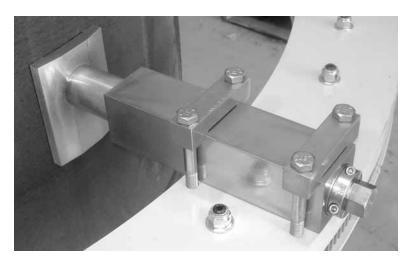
The photo shows an alternate design for the HDSF clamping leg.
